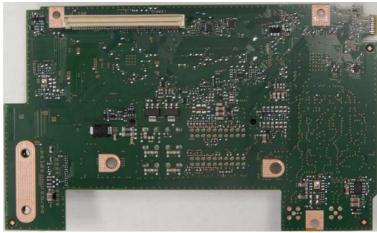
VP2 Refresh FP PowerRadio board PCB Bottom
